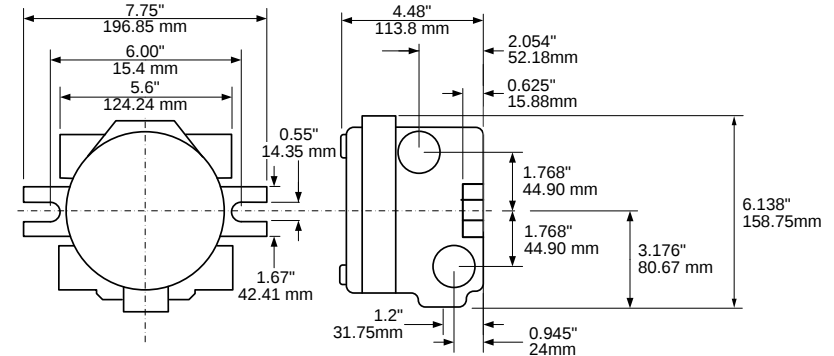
XNX Universal Transmitter mounting dimensions and clearances
